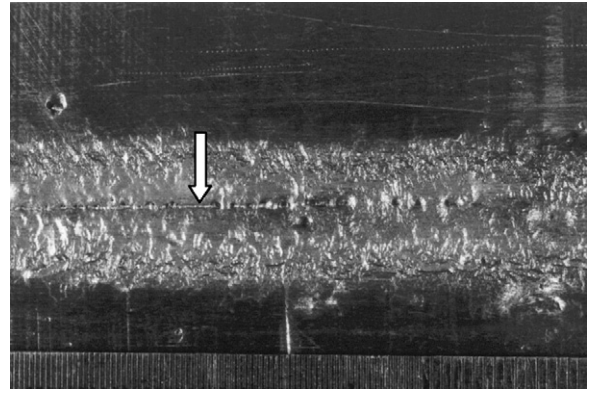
Appearance of TIG welded joint without filler.
